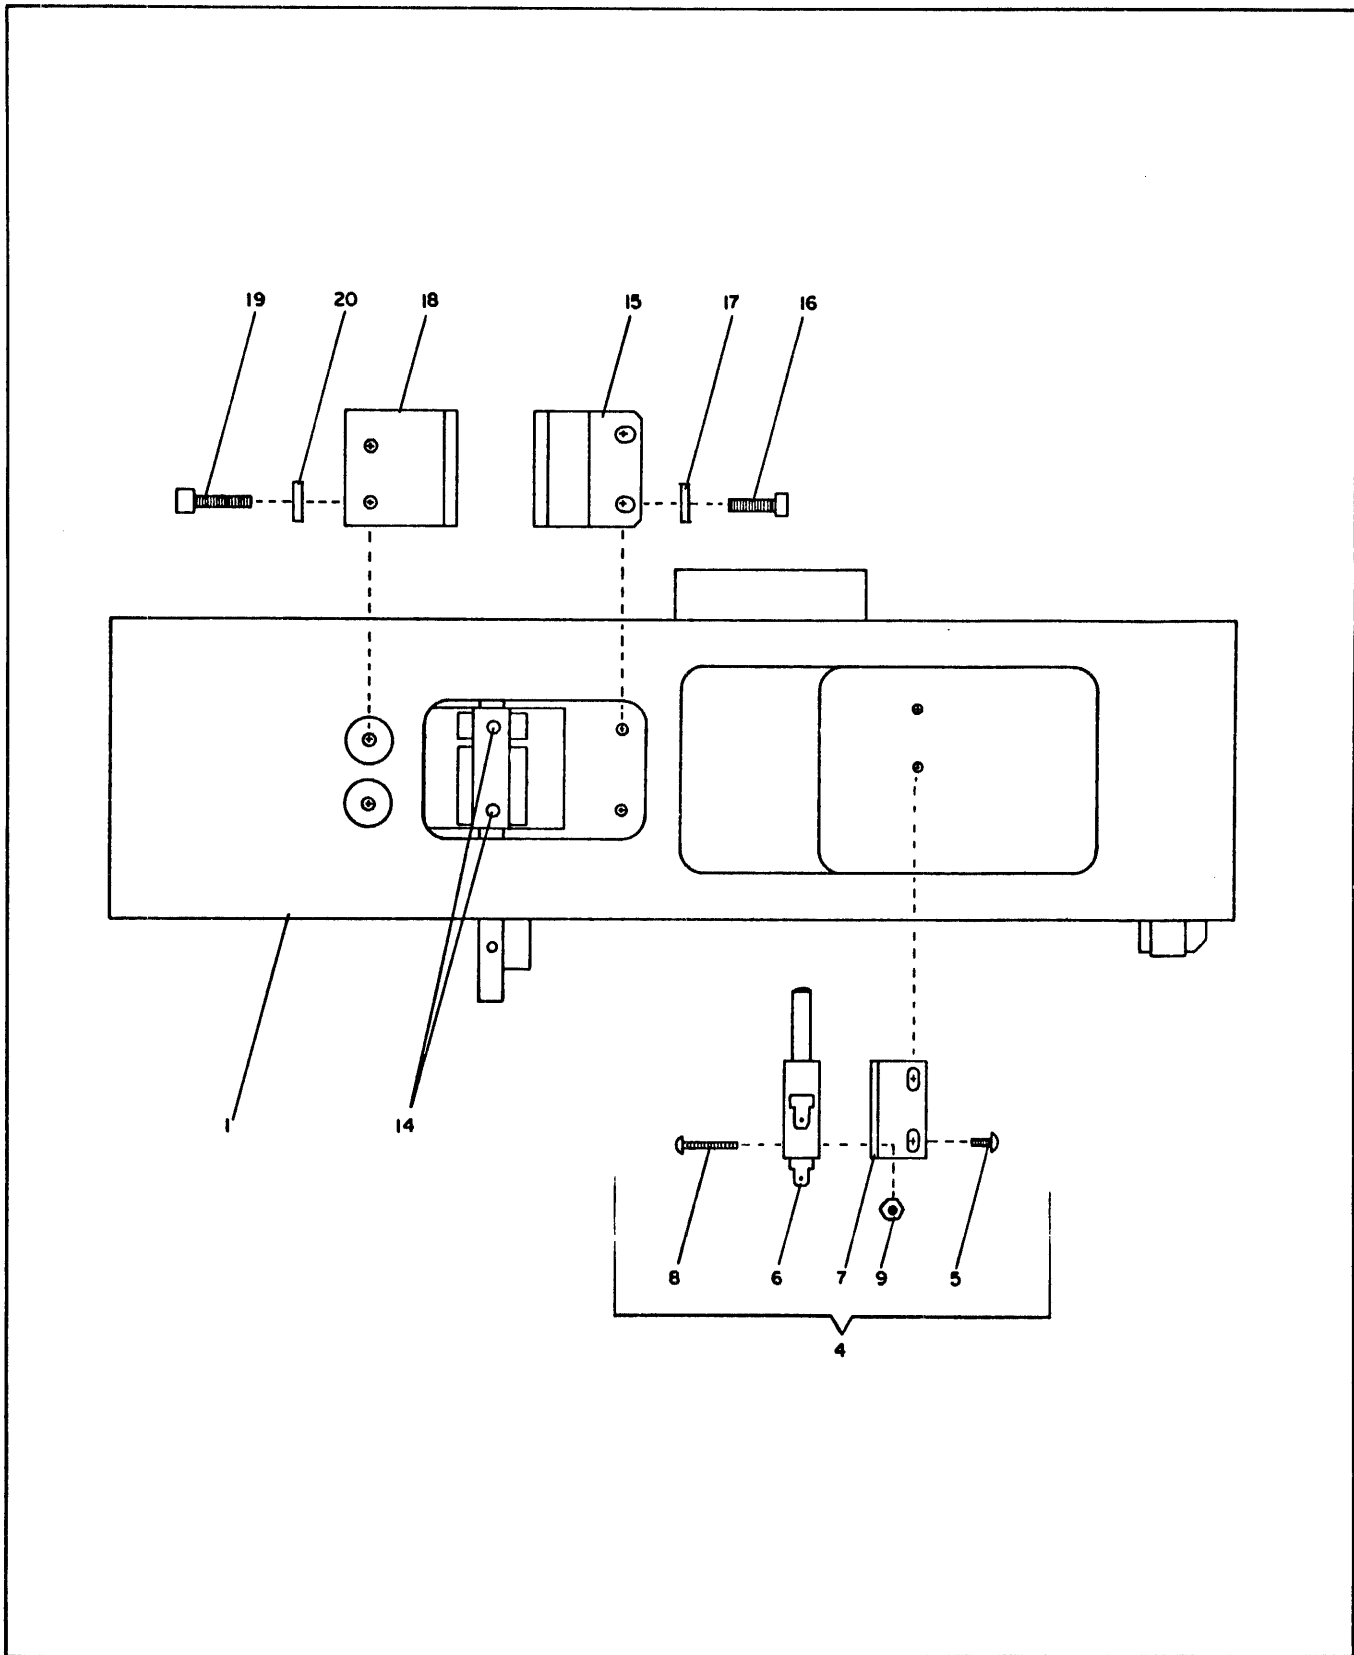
PICK SUPPORT ASSEMBLY (sheet 2 of 2)
